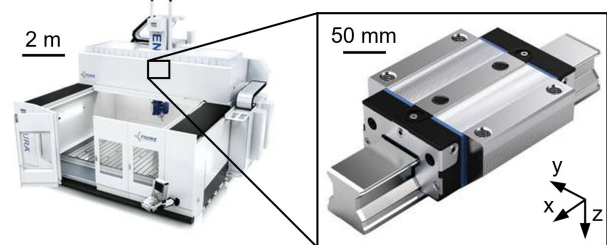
Portal milling machine from Fooke [2] and guide carriage with guide rail from Bosch Rexroth [3].
